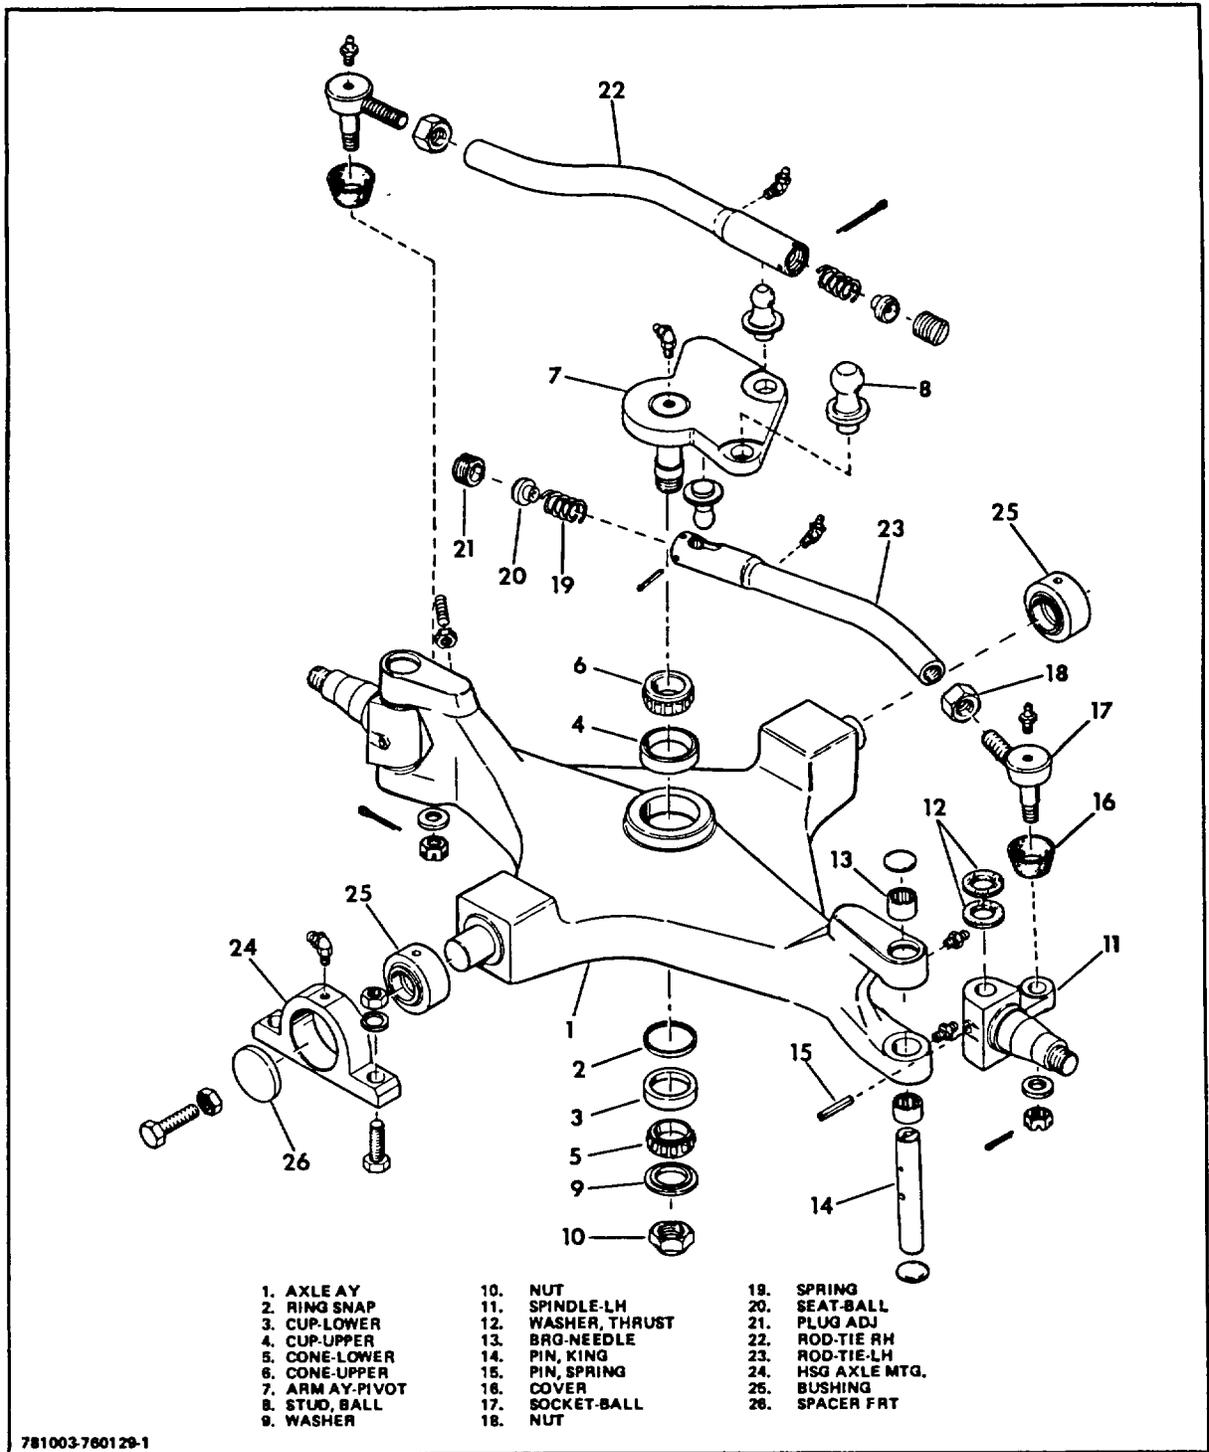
Steer Axle Assembly (ACP 60-80)
